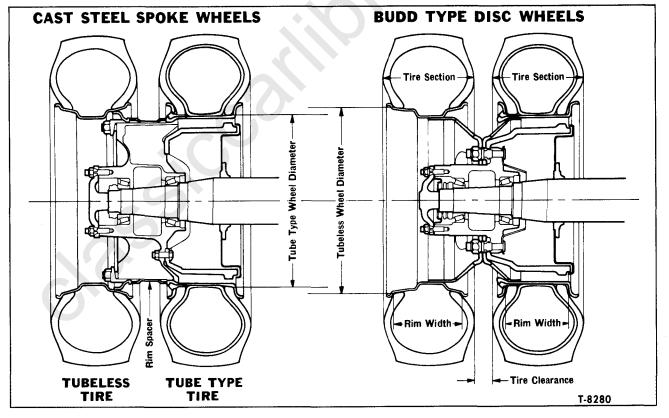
Wheels and Rim Mounting for Cast Spoke and Budd Type Disc Wheels
